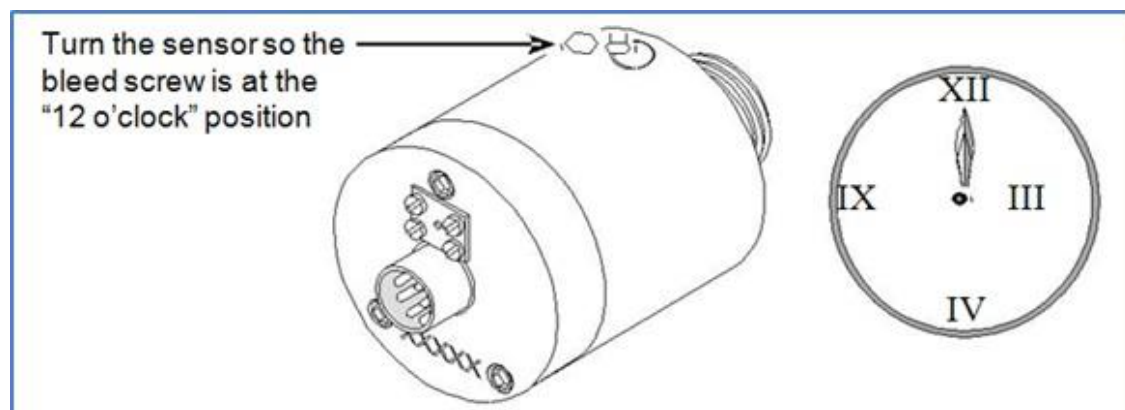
Bleed Screw must be on top, at the 12 O'clock position
